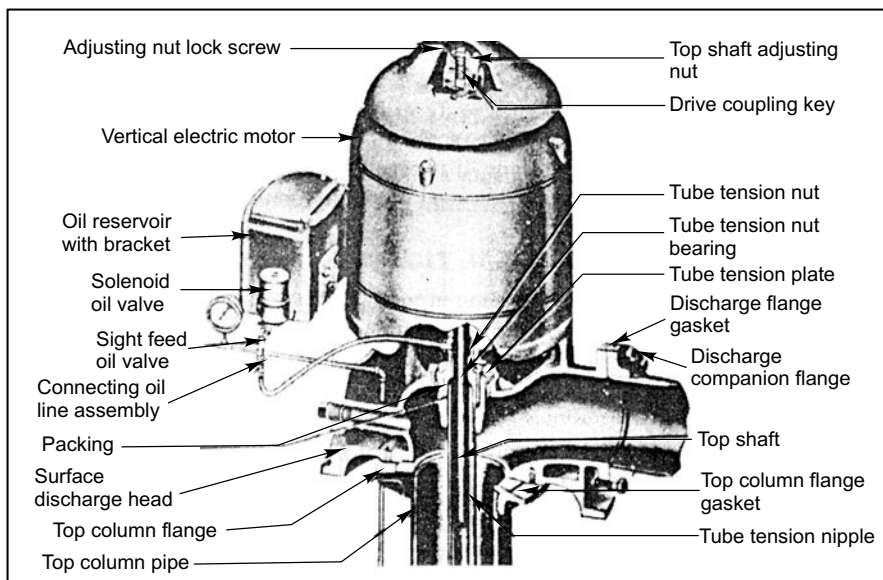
Partially exposed view of the discharge head assembly and vertical electric motor of an oil-lubricated vertical turbine pump
